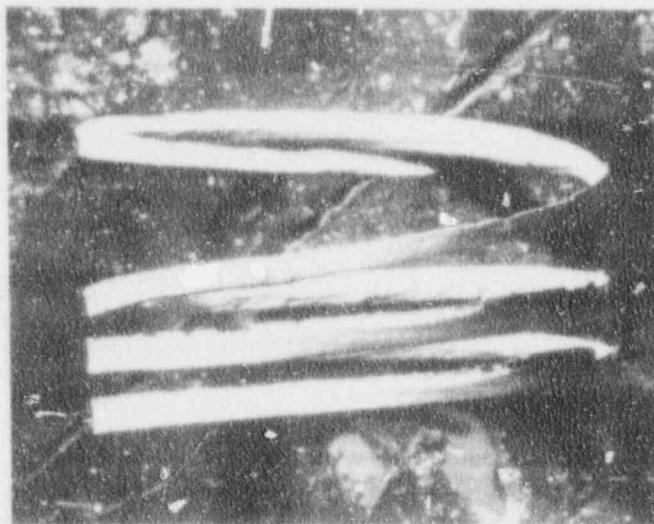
SEM fractograph of stripped threads found entrapped on the threads of the outboard bolt of bearing block number 3, at 6 X magnification.
